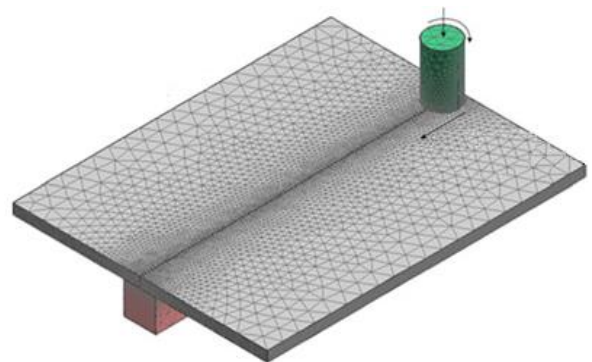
Mesh of welding parts and active element [H01]
